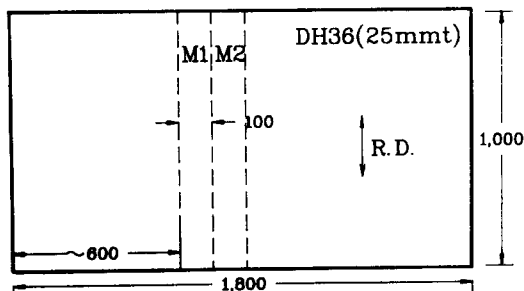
Size and cutting lines of TMCP steel plates employed for mechanical cutting experiment
